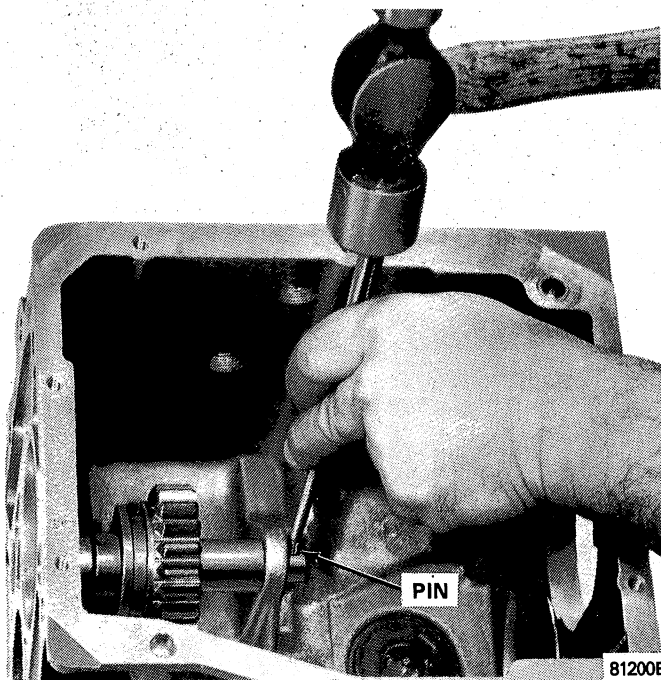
B-19 Reverse Idler Gear Shaft Removal/Installation
